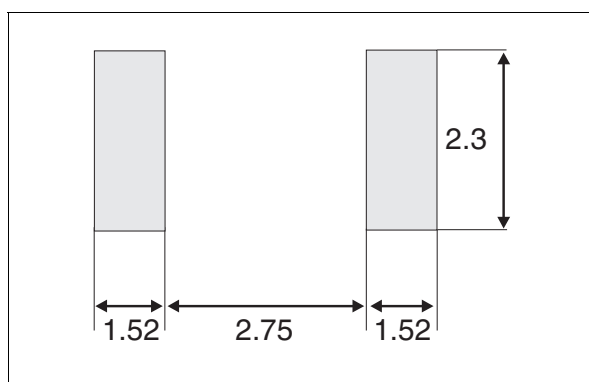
SMB Package Mechanical DataFigure 19: SMB Foot Print Dimensions
